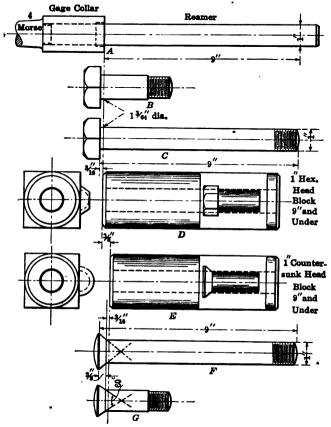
The Baldwin Locomotive Works standard taper bolt system.
